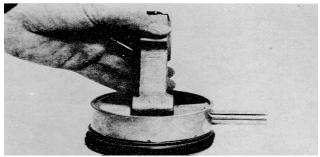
B-22. Remove Connecting Rod 28. Remove all pipe plugs from the air compressor crank-case, cylinder head and crankshaft.
